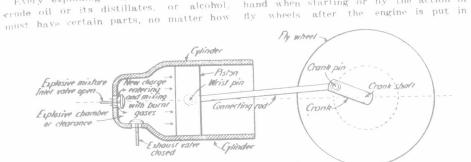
THE FIRST STROKE: SHOWING POSITION OF VALVES WHEN PISTON IS DRAWN BACK ON THE FIRST STROKE AND EXTRANCE OF EXPLOSIVE.
